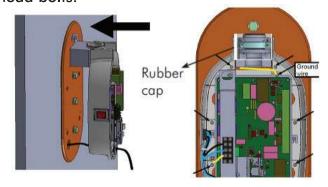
Fix base unit rear cover along with power board assembly and fix ground wire.
